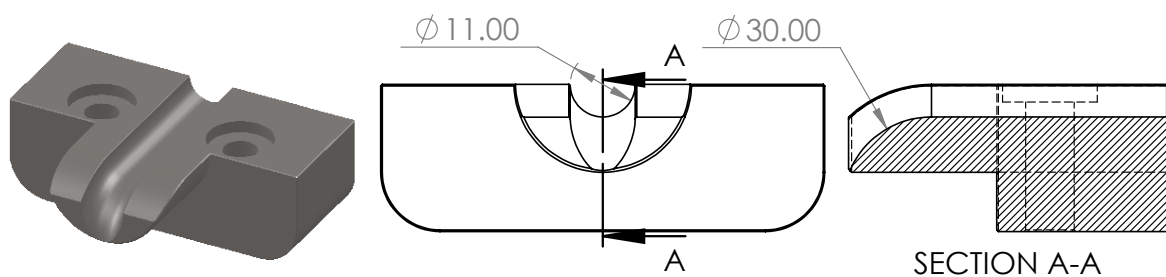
Technical drawing of the new rounded support, highlighting its main dimensions.
